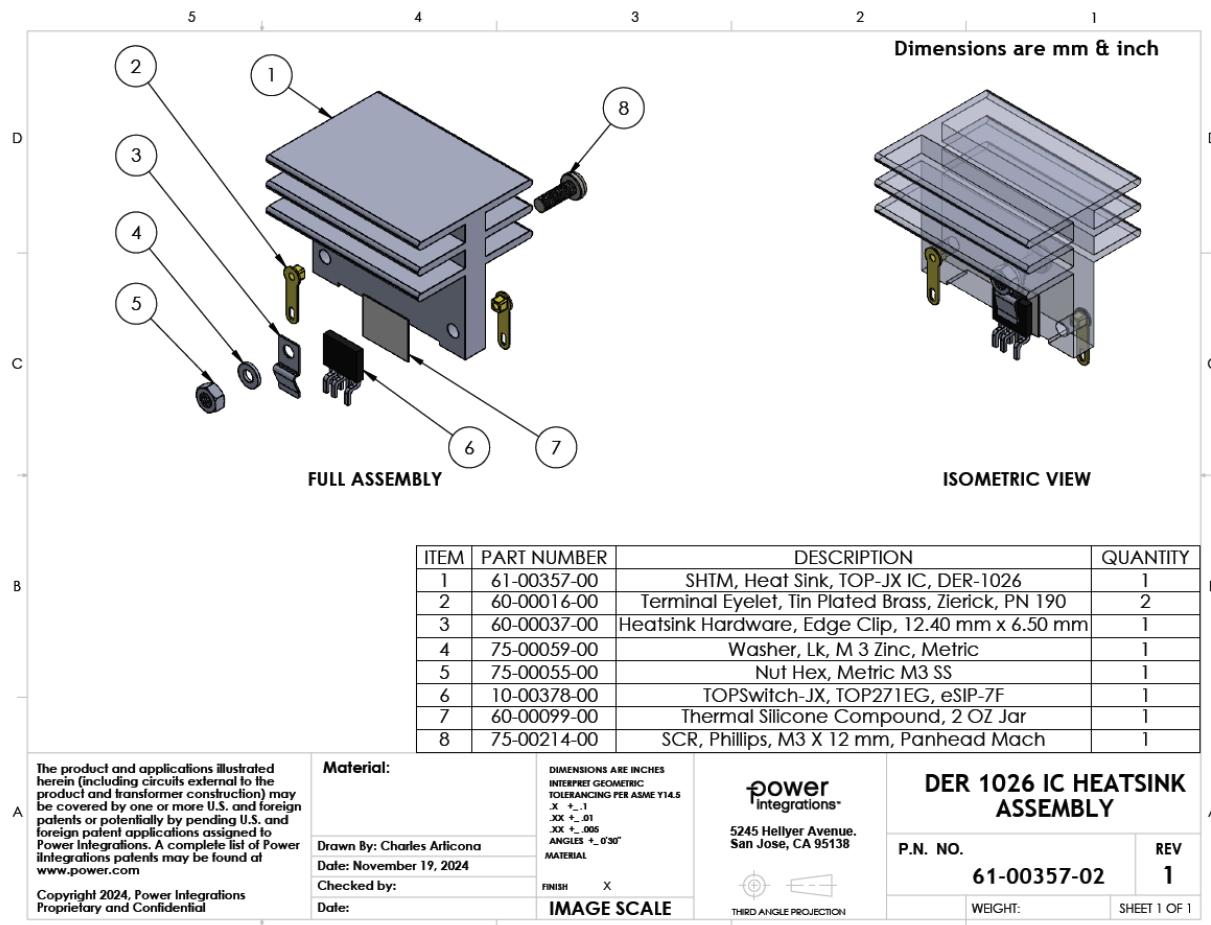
DER-1026 TOPSwitch-JX Heat Sink Assembly.
